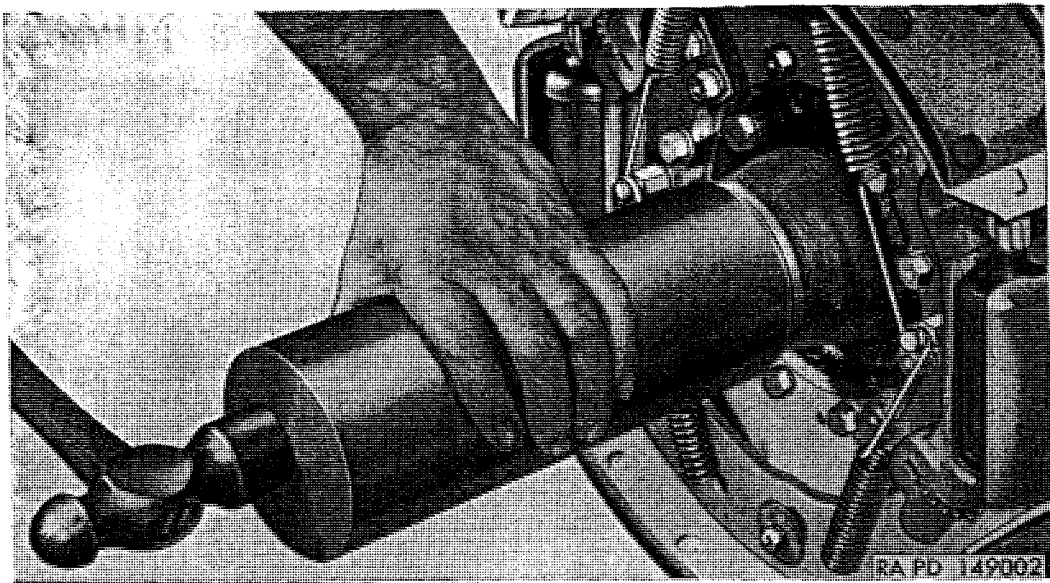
Installing oil seal sleeve (rear shown) using replacer B7950063.
